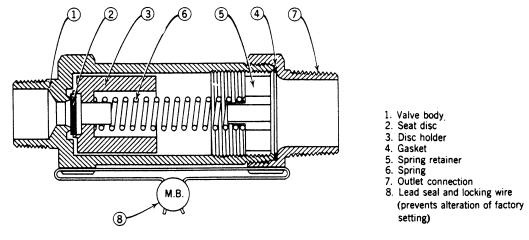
Typical relief valve. (Courtesy of Mueller Brass Company.)
